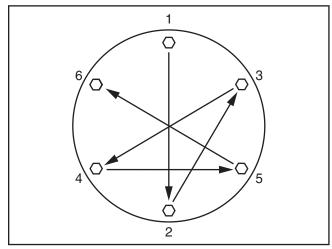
Alternating star pattern for tightening components assembled with a gasket.
